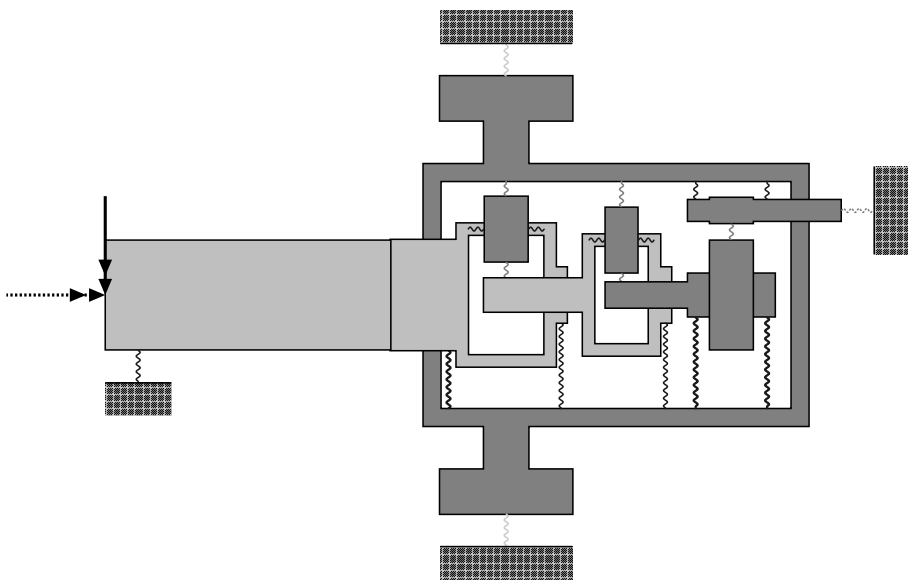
Gearbox model with advanced bearings, main shaft, main bearing and rubber supports.
